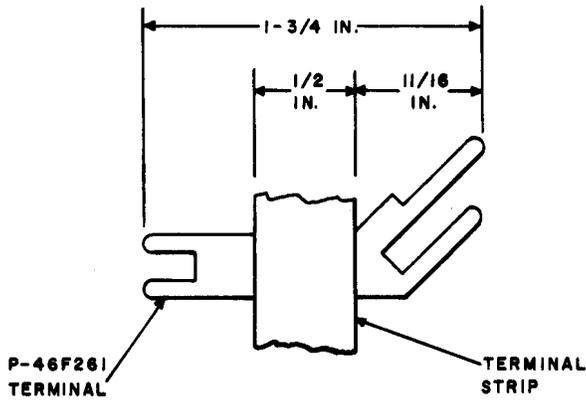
P-46F261 Flat Punched Terminals Arranged for Wrapped Connections
